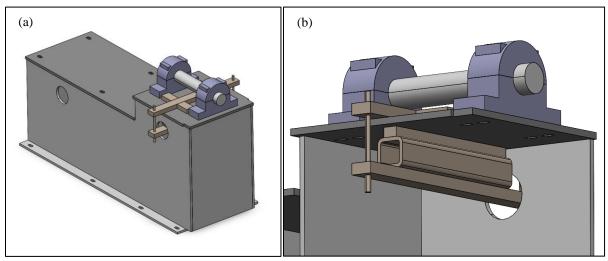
(a) ISO View of Clamp Design. (b) Enhanced View of Clamp Design.
